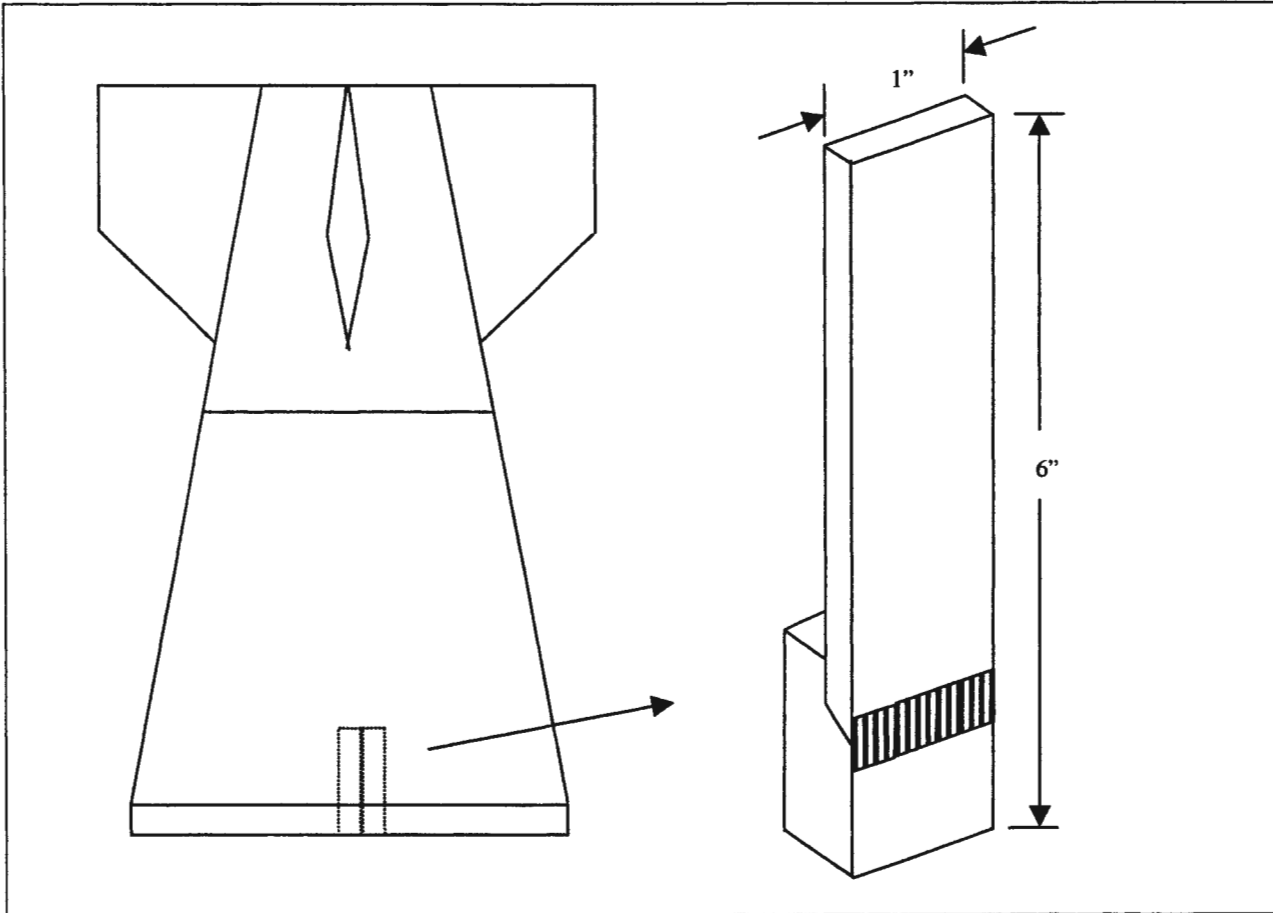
Method of sectioning for fillet weld specimens.
